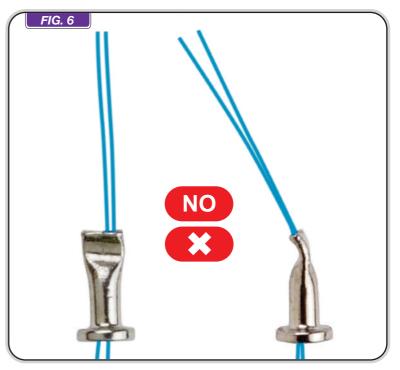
For comparison, front and side enlarged views of an incorrectly crimped fastener that was not fully seated in the device tip
